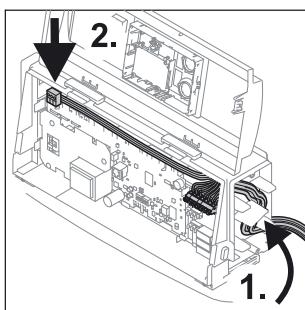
Route cabling into the regulator and make the electrical connections.
